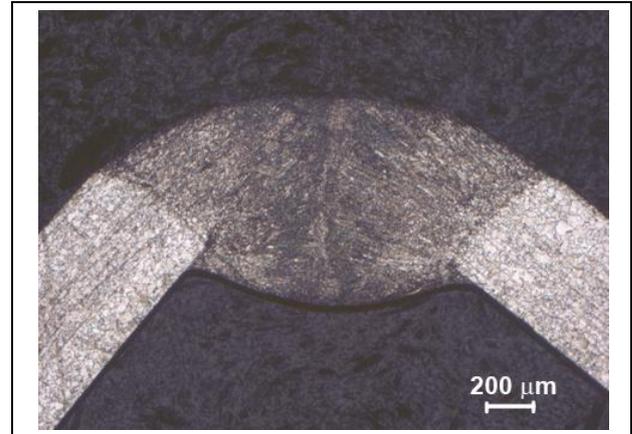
Metallographic macrograph of GTAW weld
